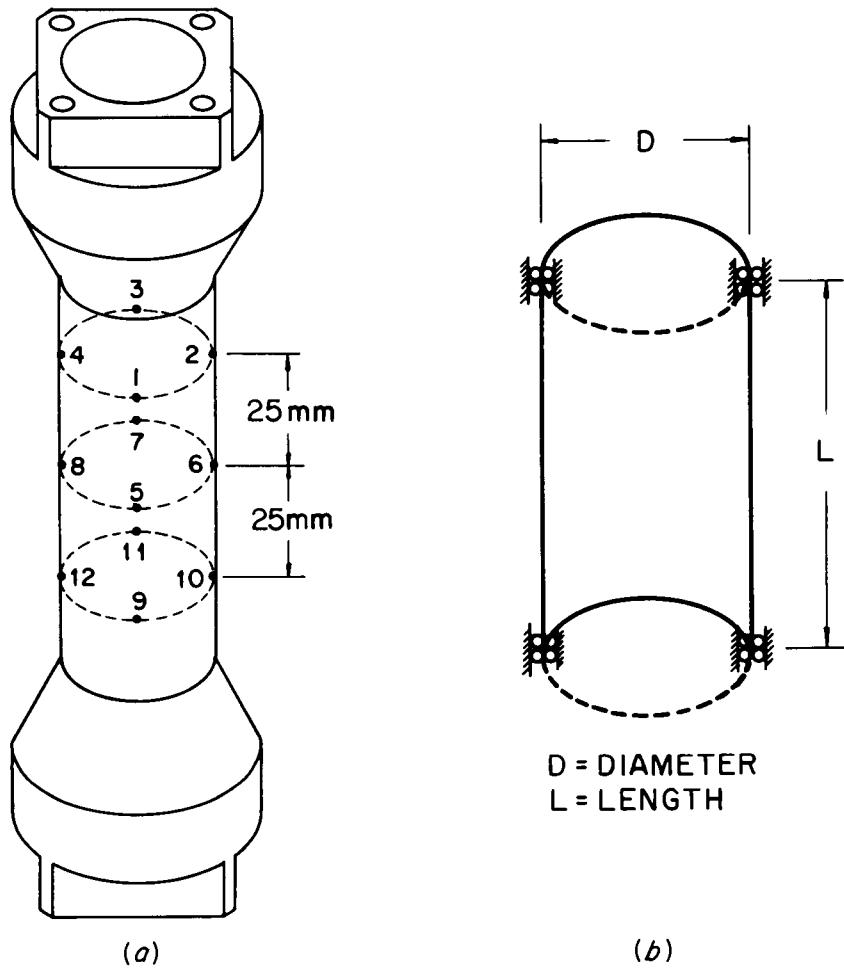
Biaxial test specimen geometry; (a) measurement locations, (b) idealized uniform cylindrical thin shell with roller-guided ends.
